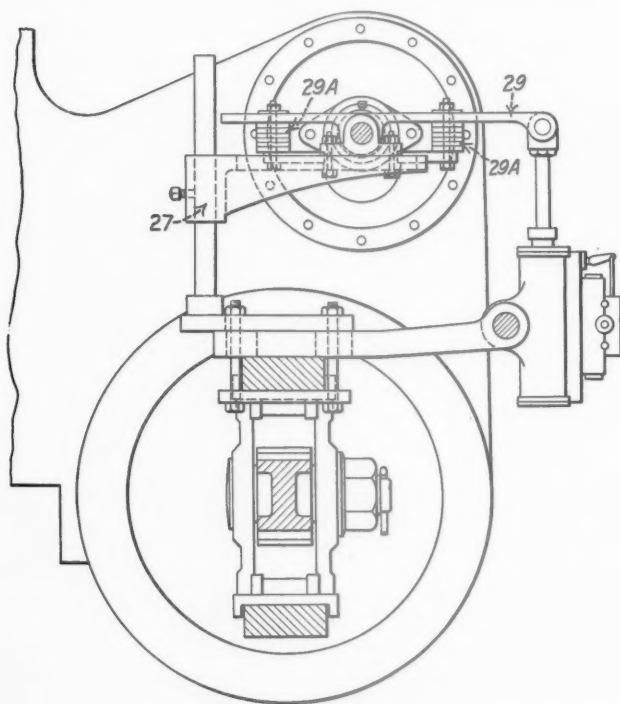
Two types of oscillating levers are used for the old and new style back valve chamber heads
